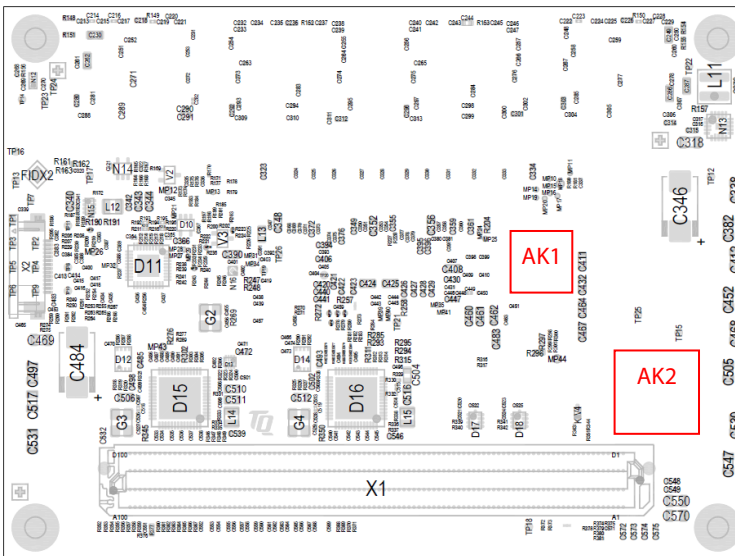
TQMxCU1-HPCM Component Placement Bottom
